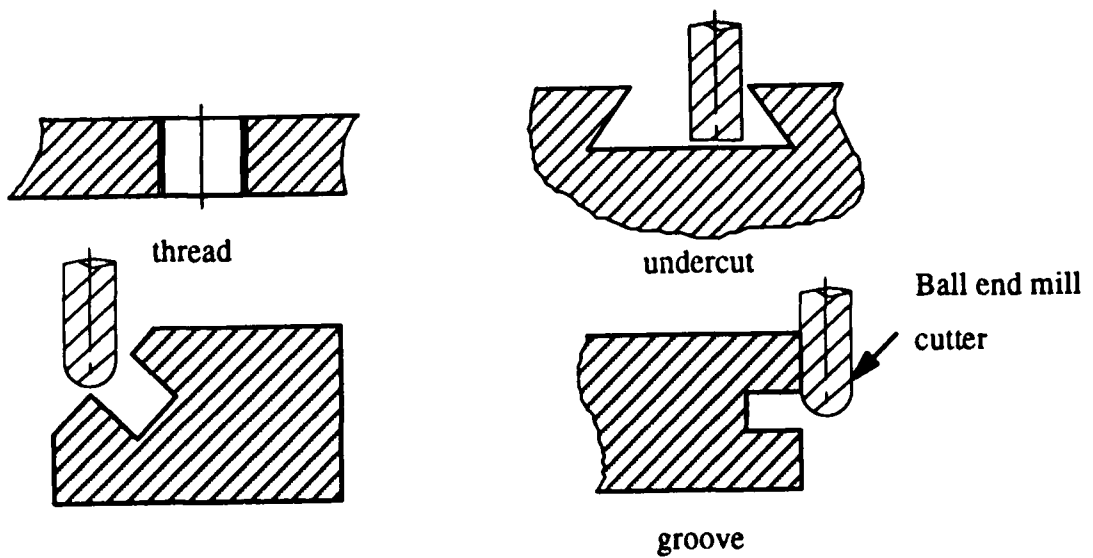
Examples of geometrical constraints in adaptive laminated machining
